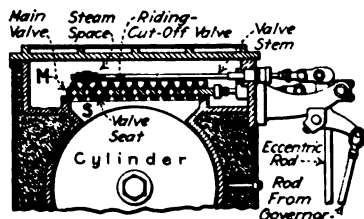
Section of a cylinder with a gridiron valve (McIntosh and Seymour valve).
